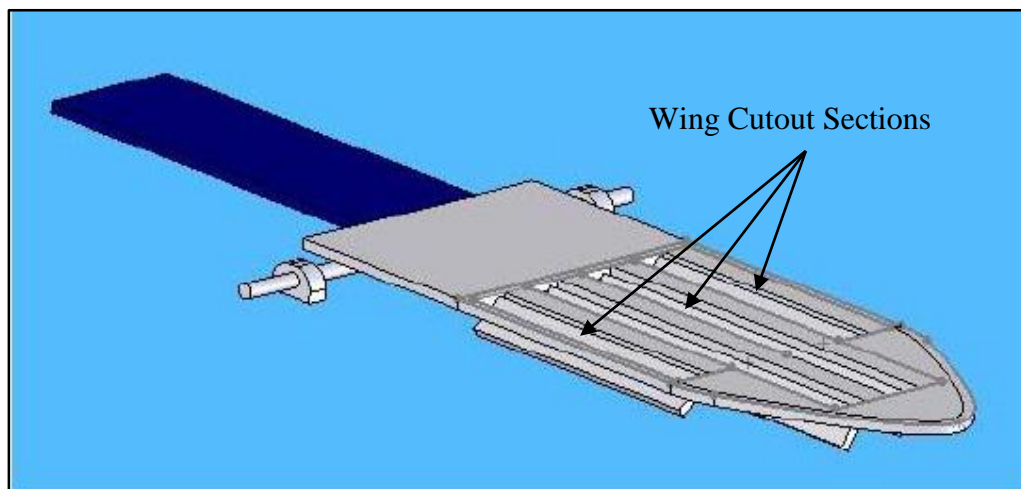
Schematic of wing design showing the sections, which would be exposed during the upstroke [27].
